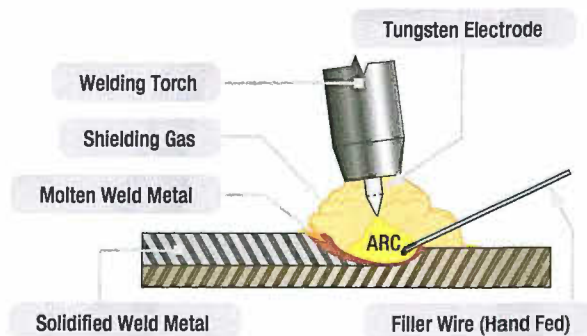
Tungsten inert gas (TIG) welding process.
